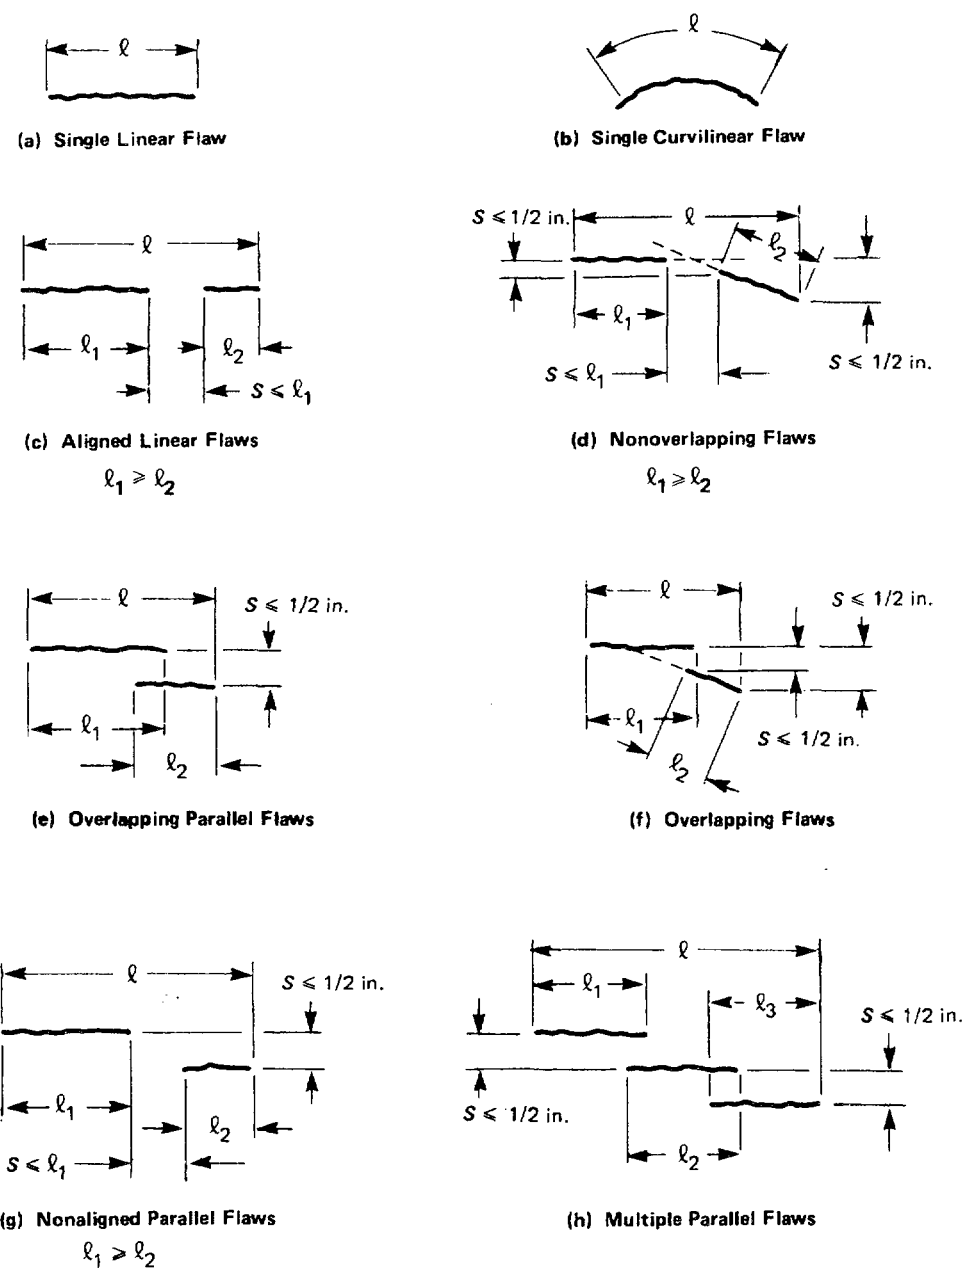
Section XI Flaw Proximity Rules for Surface Flaws (Figure IWA-3400-1)
